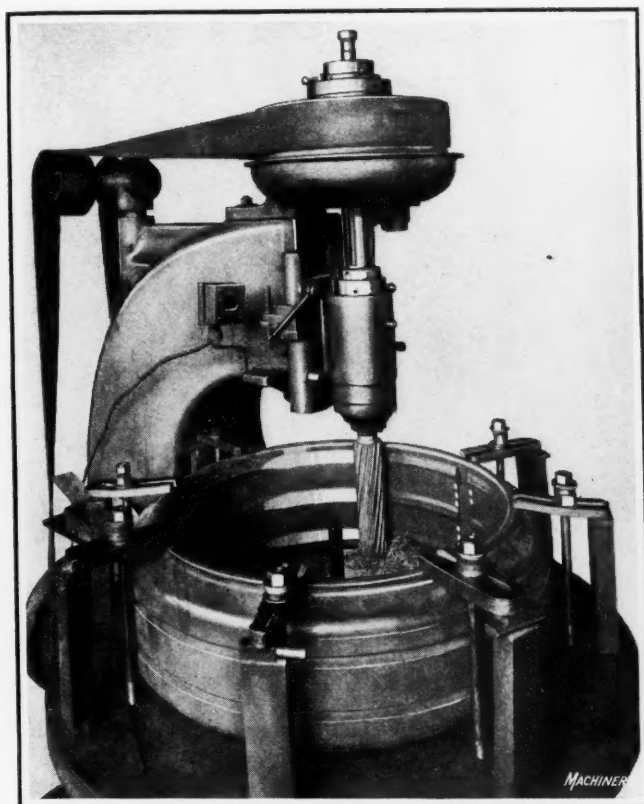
Vertical Rotary Milling Machine set up for milling Truck Tire Molds
